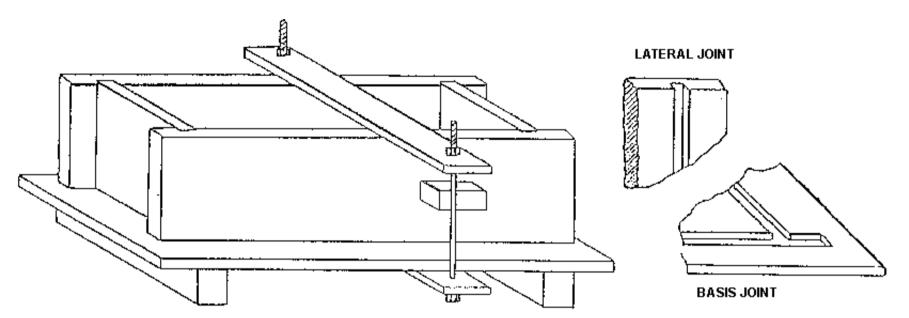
MOULD FOR COLDING AND HARDENING WITH CONSTRUCTION DETAILS
